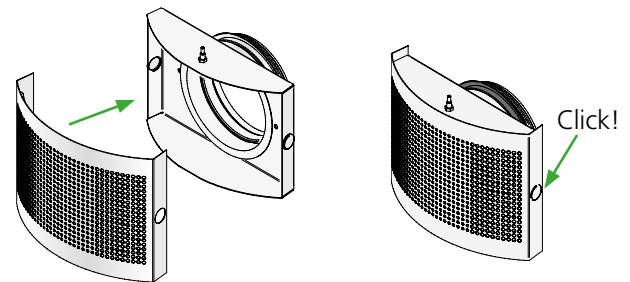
Assembling the front, press the front straight towards the wall plate until it snaps into position.
